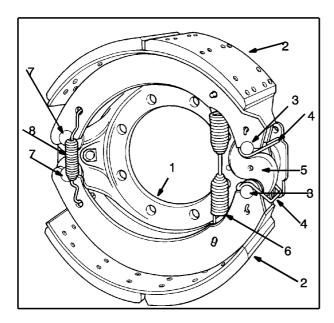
Rockwell "Q" Series Brake With Spider and Removable Anchor Pins
